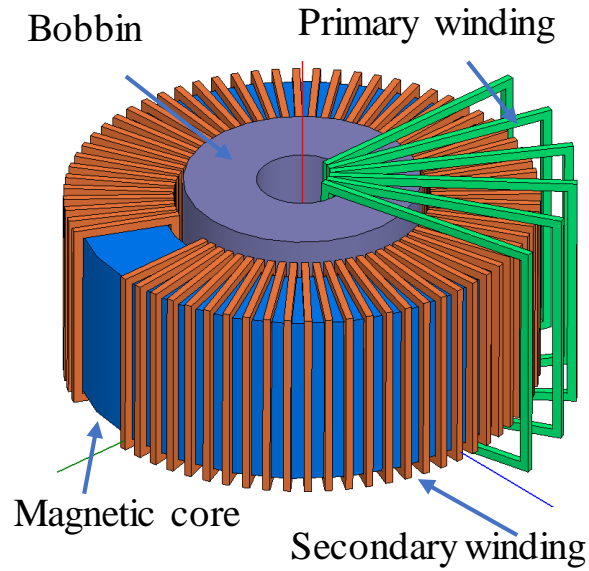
Layout of the elementary HV wire-wound transformer
